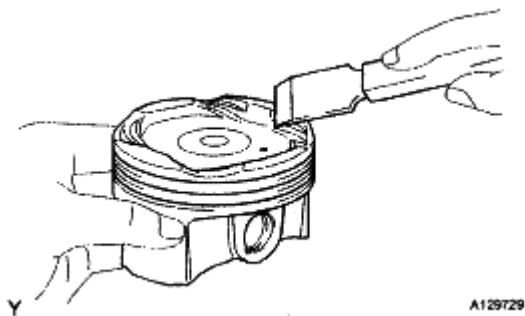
Using Gasket Scraper To Remove Carbon From Piston Top
